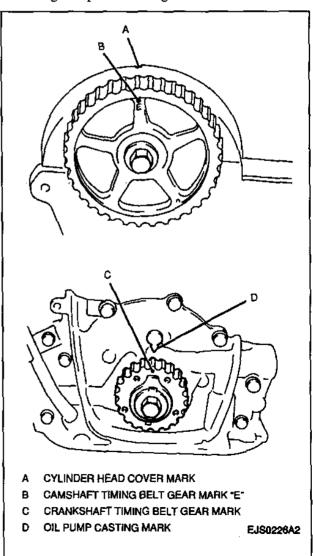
Camshaft and Crankshaft Timing Belt Gear Timing Marks
